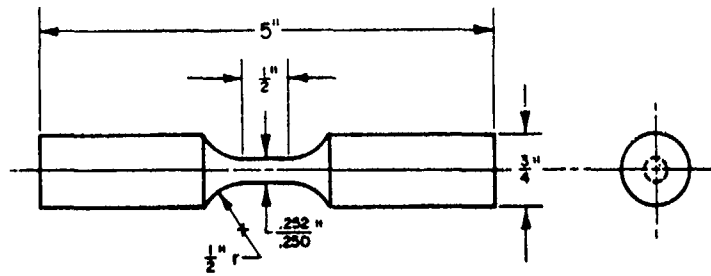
Unnotched fatigue specimen for 7149-T73 hand forging.
